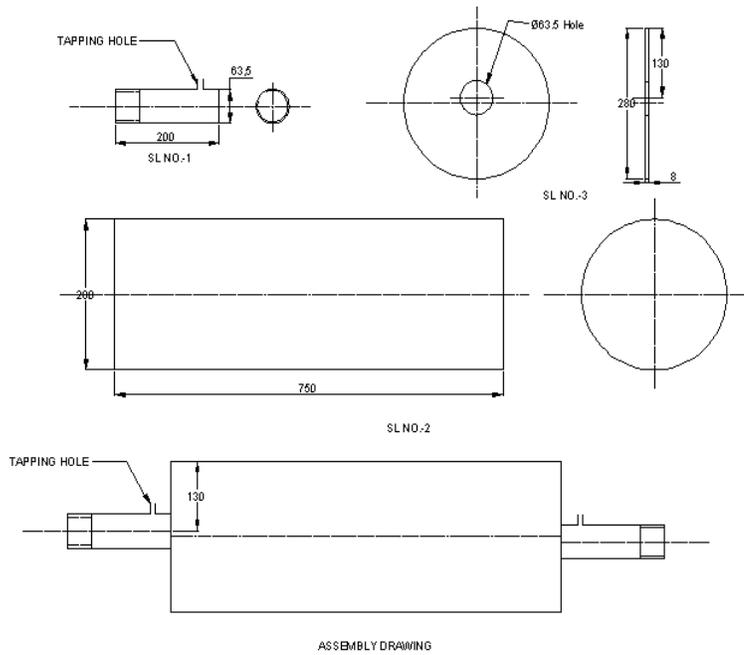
shows the details and assembly drawing of the reactive muffler. Component 1 is a M.S. pipe of 63.5 mm diameter and 200 mm length. The wall thickness of the inlet pipe is about 2 mm. Component 2 is the hollow cylinder of 200 mm diameter and 750 mm length. The hollow cylinder was prepared by cutting M.S. plate of 3 mm thickness as per given dimensions. The plate was bent to the truly cylindrical shape with the help of solid cylinder of 200 mm diameter and 750 mm length. The edge of the plate was welded by electric arc welding, which consists of welding tool, design for manual manipulation by the user and an electric power unit. Component 3 is the cover plate. The two side cover plates were welded to the hollow cylinder, inlet and outlet pipes are welded to the cover plates as shown in the figure. Thus assembly of the reactive muffler was carried out as shown in the assembly drawing.
